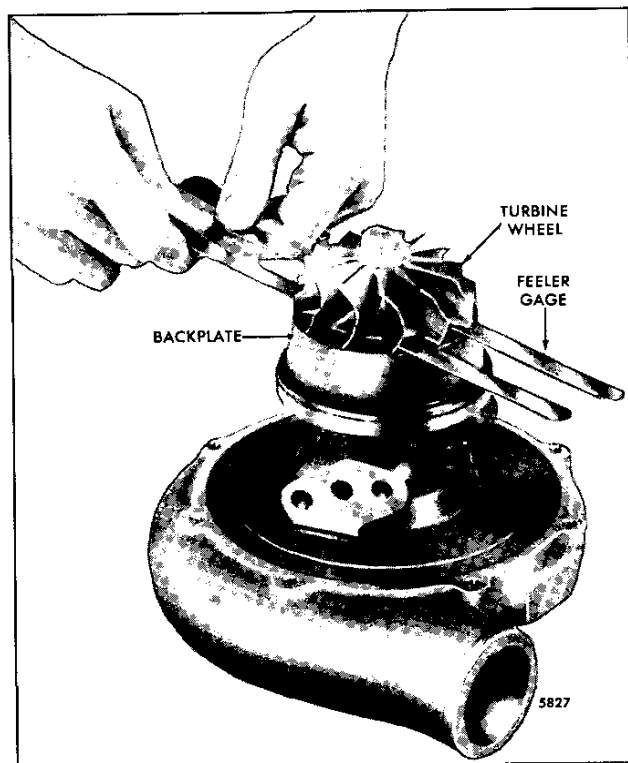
Checking Turbine Wheel to Backplate Clearance
